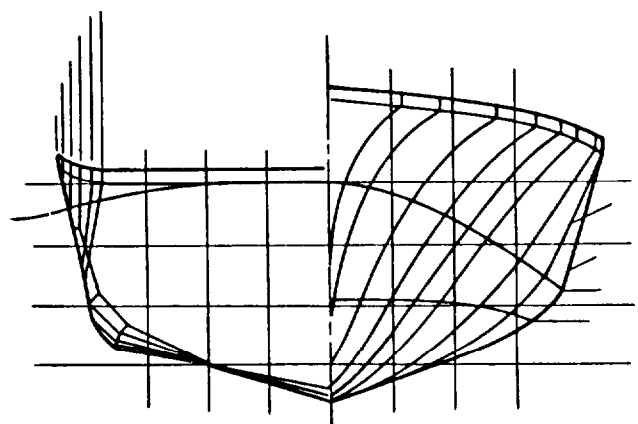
Body Plan for Modern Double-Chine Planing Hull.
